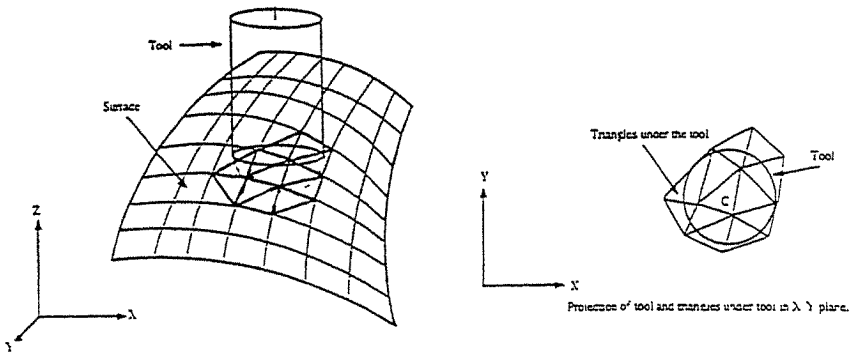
Tool and triangles under the tool that will effect the tool interference calculation
